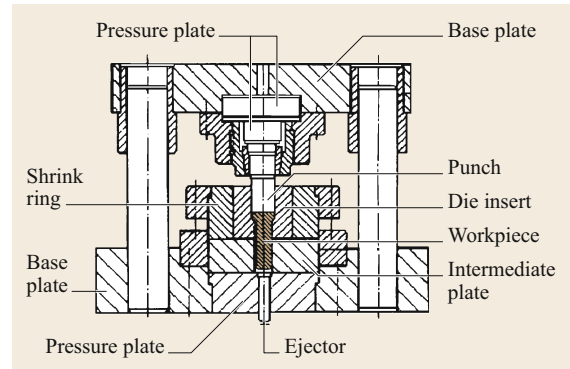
Typical tool setup for cold forward rod extrusion (after [11.23])
